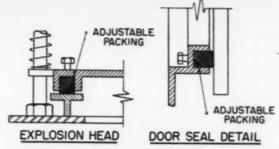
Method of installing adjustable packing for sealing outer door, and explosion head.
